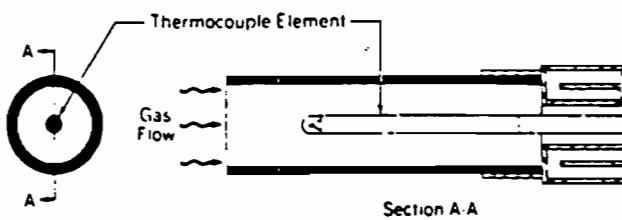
High Velocity Thermocouple-Single Shield Assembly
